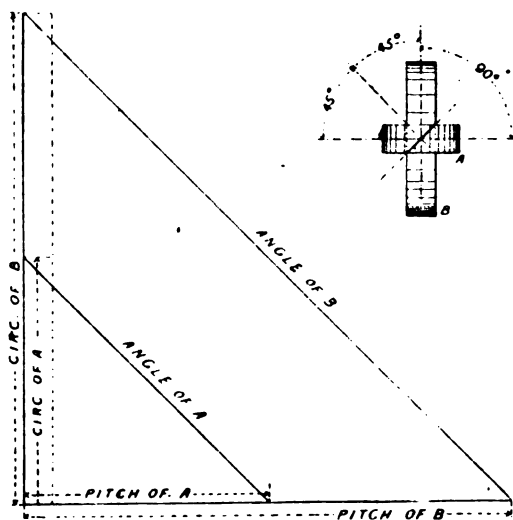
Spiral Gears of Different Diameters, but Equal Angle.
